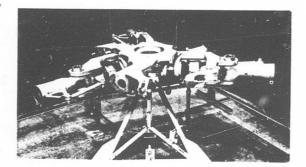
Prototype of Elastomeric-Bearing Rotor Hub.
